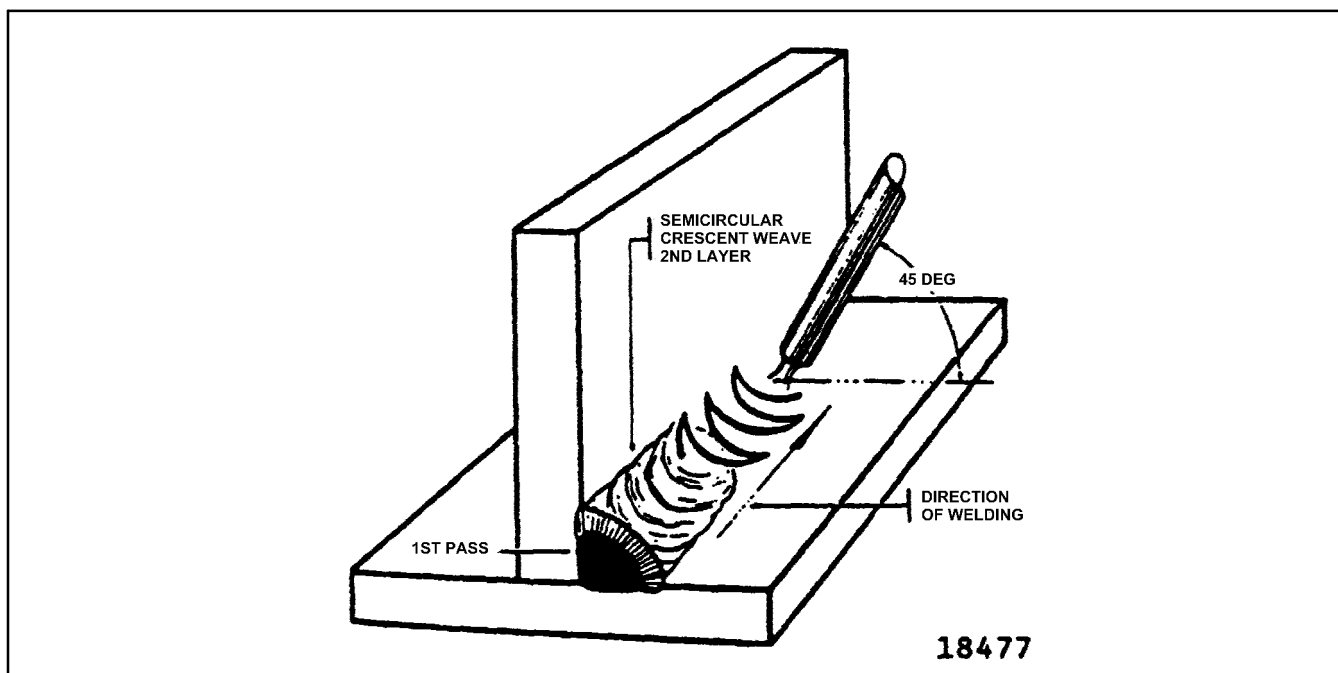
Weave Motion for Multipass Fillet Weld
